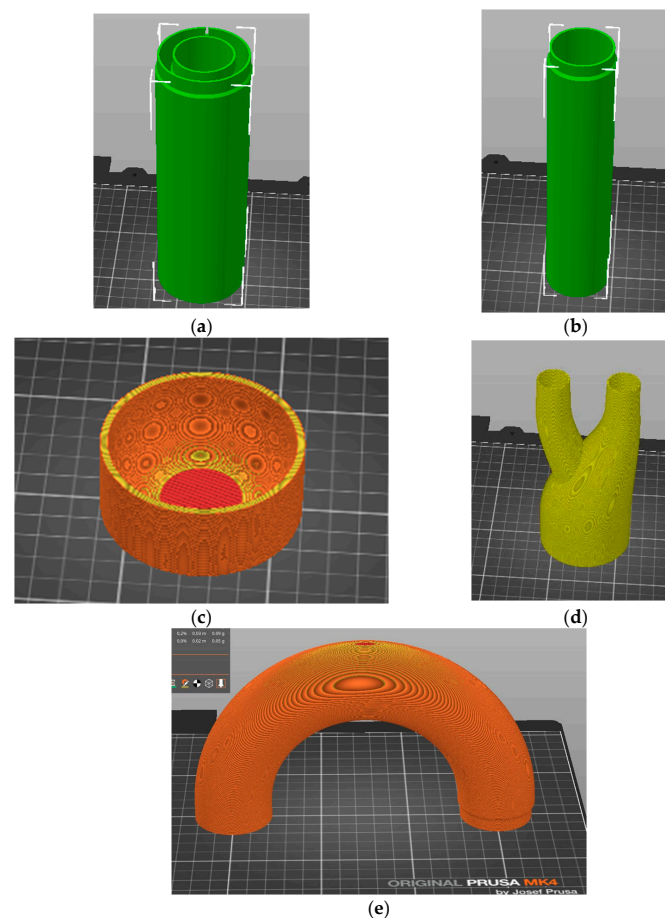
The 3D printed pieces: (a) model of the coaxial pipe; (b) model of the simple pipe; (c) model of the cap-style return piece; (d) model of the double-entry piece; (e) model of the U-shaped return.
